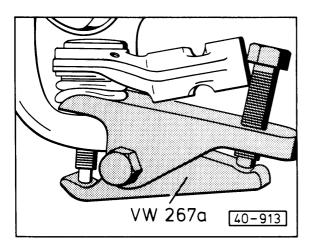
Lower ball joint, pressing out of wheel bearing housing
